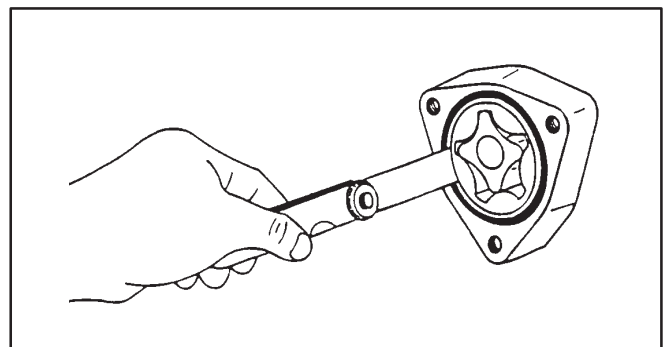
MEASURING PUMP OUTER ROTOR TO BODY CLEARANCE
